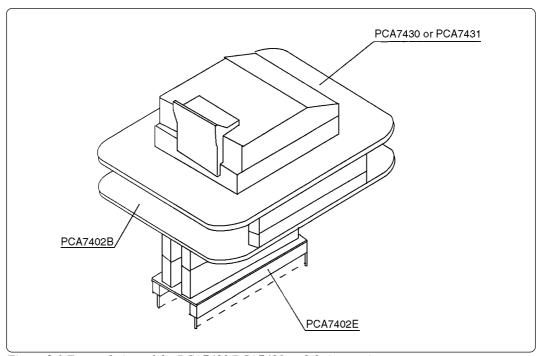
External view of the PCA7430/PCA7431 and their constituent parts
